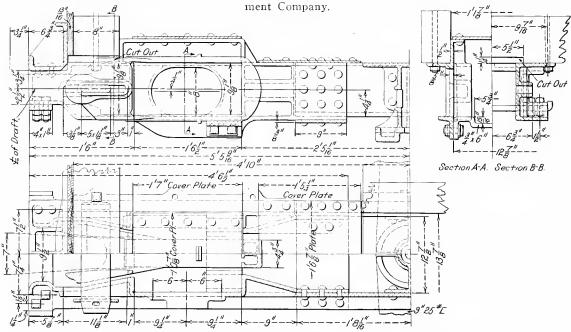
Universal Attachments and Keyed Yoke with Cast Steel Draft Arms, for Cardwell Friction Draft Gear, Type G. Universal Draft Gear Attachment Company.
